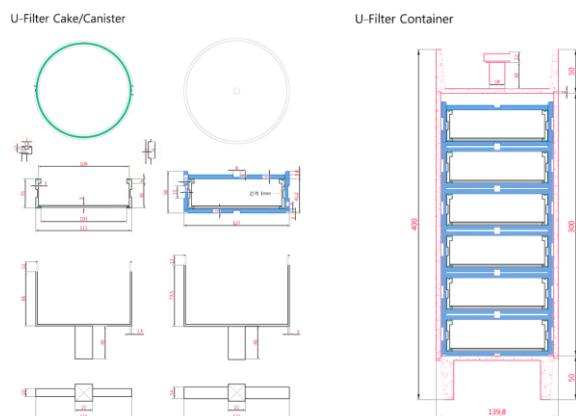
Drawing for uranium filter, filter canister and filter container with manipulator handling tool.
